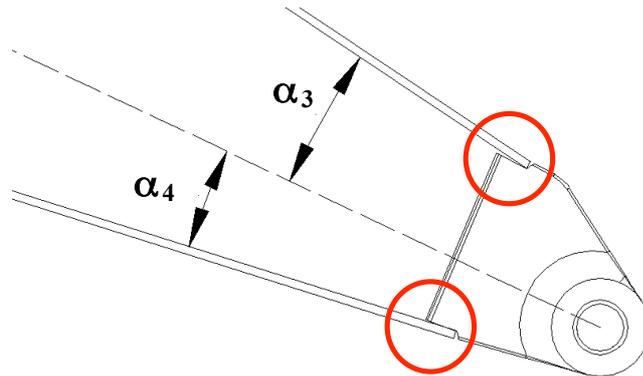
Welded regions on the chassis mounting bracket.
